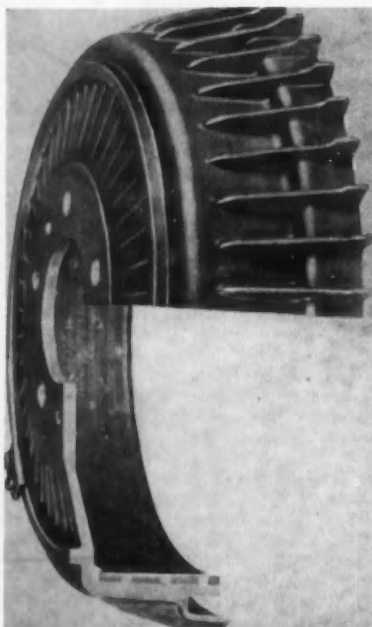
Bimetallic brake drum uses aluminum as drum material and cast iron inserts as the braking surface.
